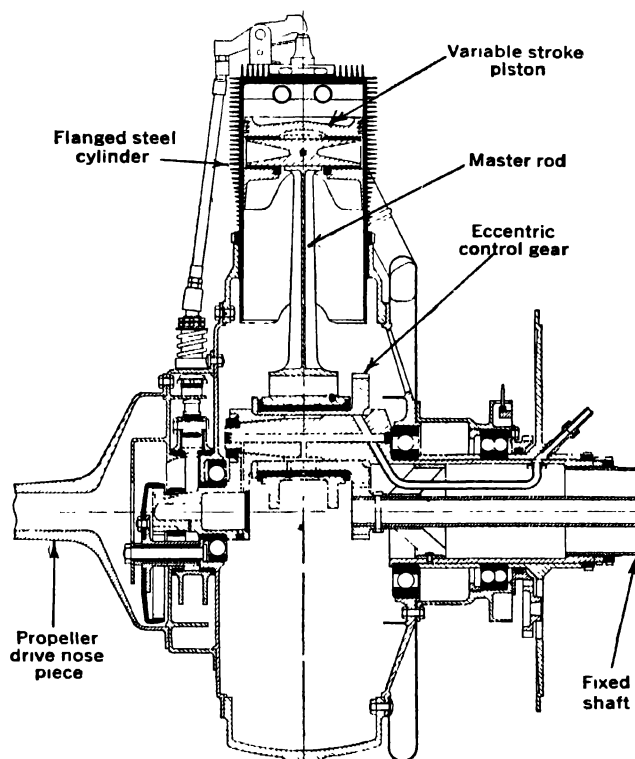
The Damblanc Rotary Radial Air-Cooled Four-Cycle Engine Incorporated the Distinctive Feature of Having Mechanism to Vary the Piston Stroke and Compression of the Engine.
